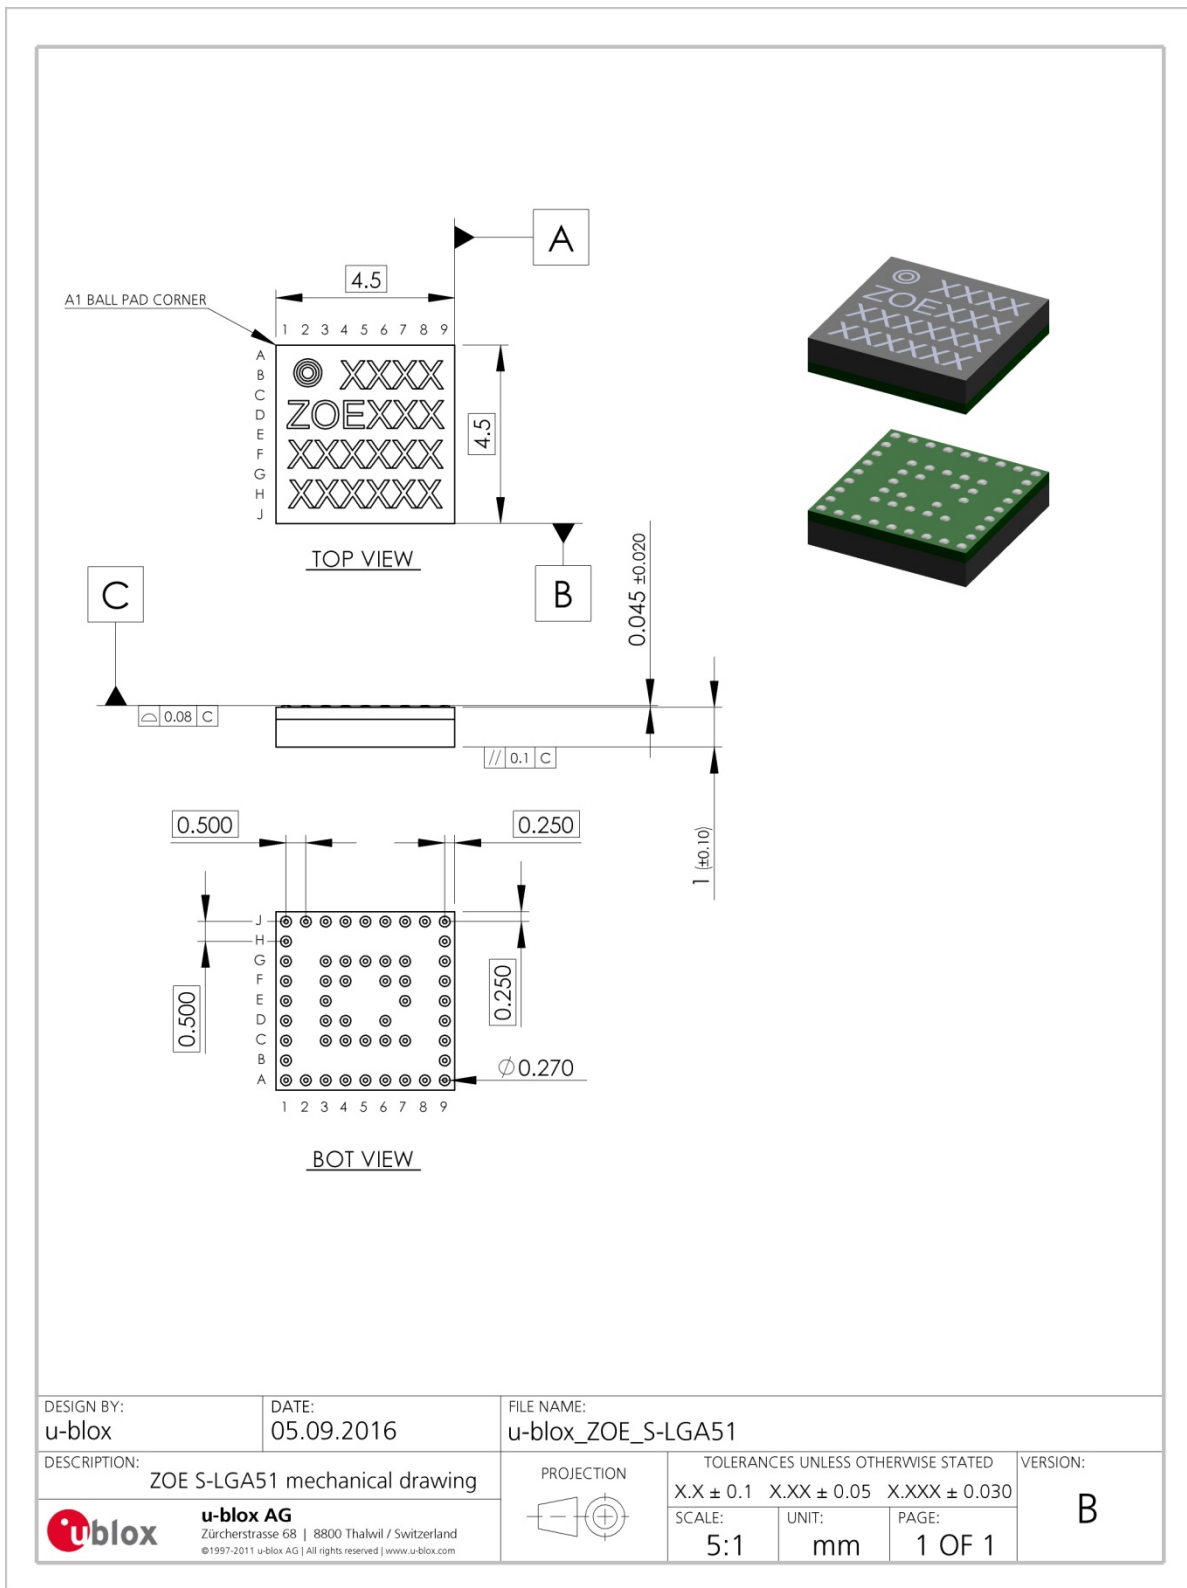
Mechanical drawing for ZOE-M8 (S-LGA), bottom view
